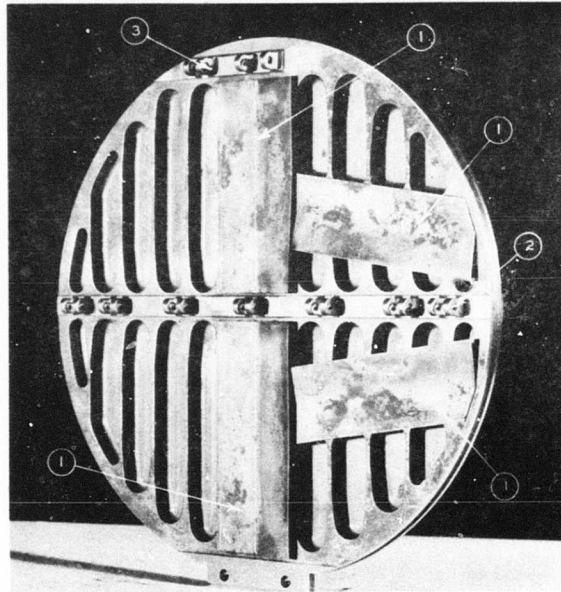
Bulkhead Assembly: (1) Four Strips Which Act as Seals Against the Screening Package, (2 & 3) Lugs Which Hold Pins for Inner and Outer Tie Plates.
